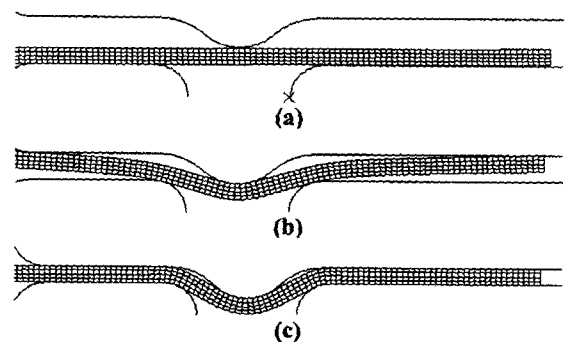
Deformed shapes of the blank during the bead formation process of circular drawbead in frame_frft_in: (a) initial state; (b) punch stroke = 1.5 mm; (c) punch stroke = 3 mm.
